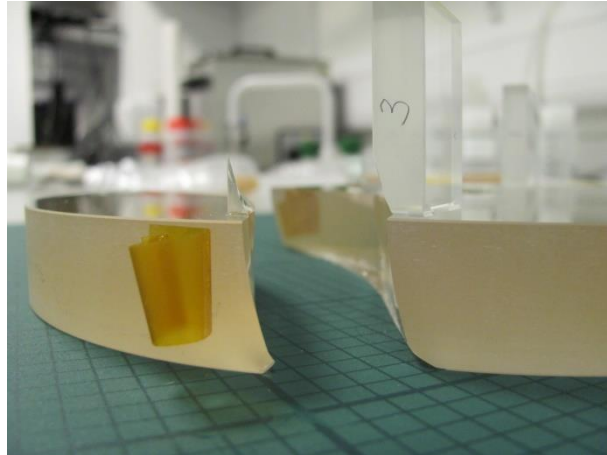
Photograph of the separated parts of the failed baseplate. Note the shard of component still bonded after the crack propagation passed through the bond layer and component.
